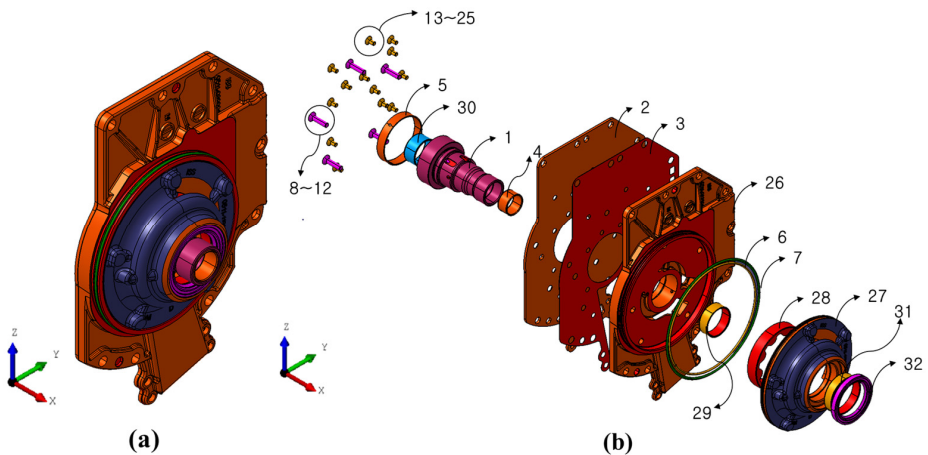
Test product (a) assembled automotive oil pump product, (b) disassembled 32 parts of automotive oil pump product
